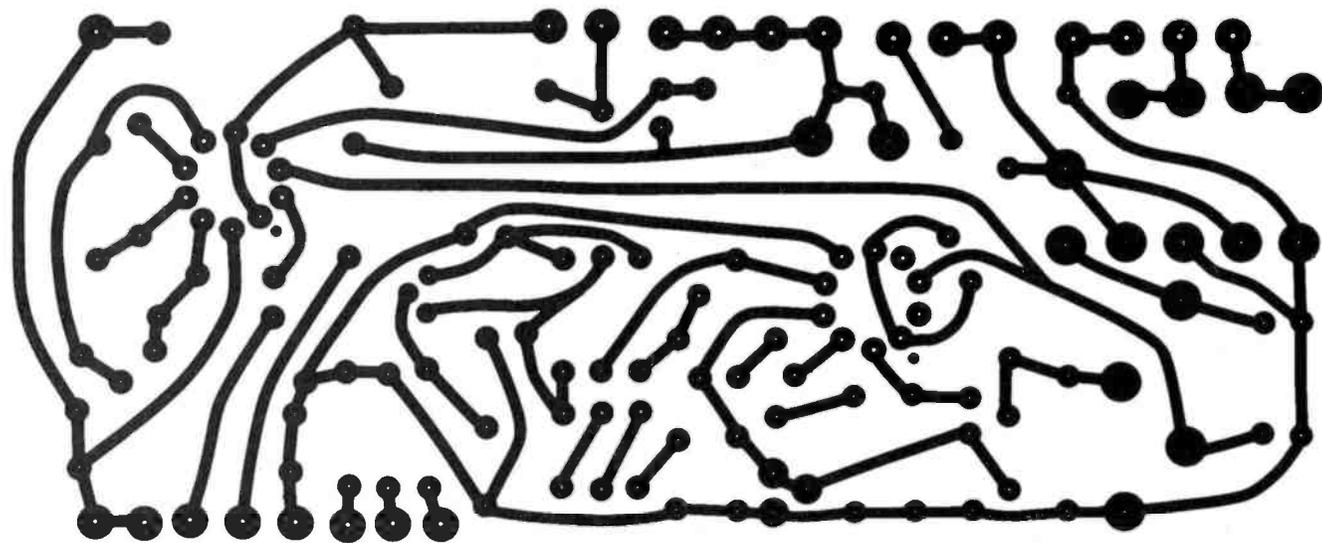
Actual-size etching and drilling guide is shown above; component-placement diagram is at left; table at right details hookups between board and off-the-board components.
